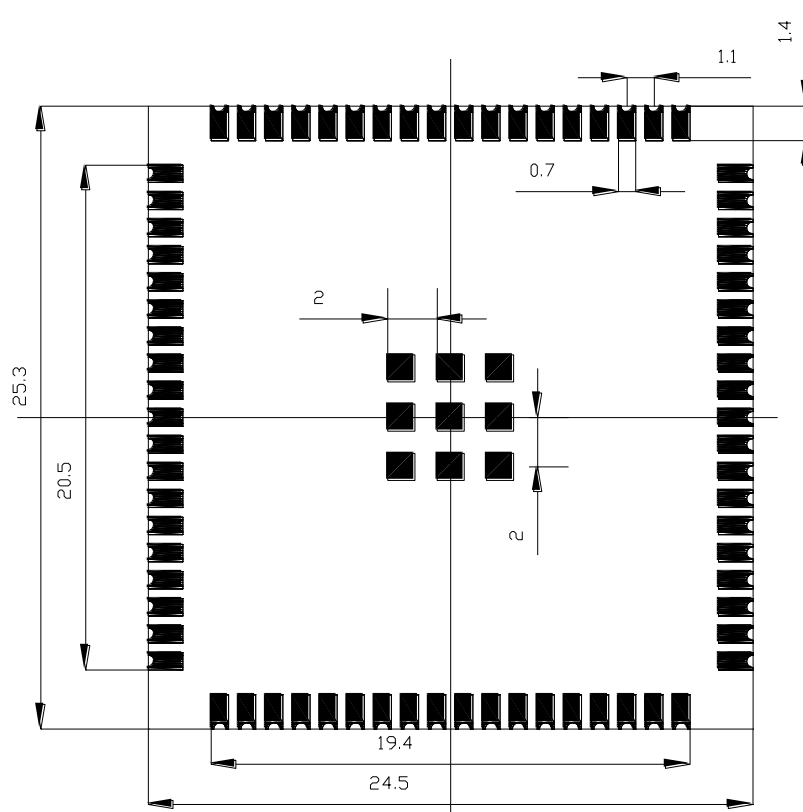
M85 Module Bottom Dimensions (Unit: mm)
